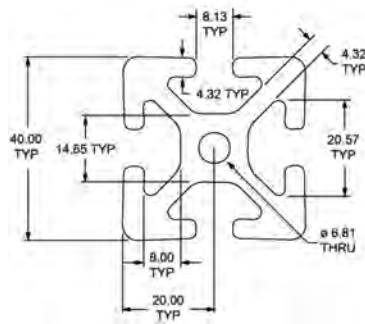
A picture of a section of the T-slot extruded aluminium support bar used to create the main load bearing members. All dimensions are in millimetres.
